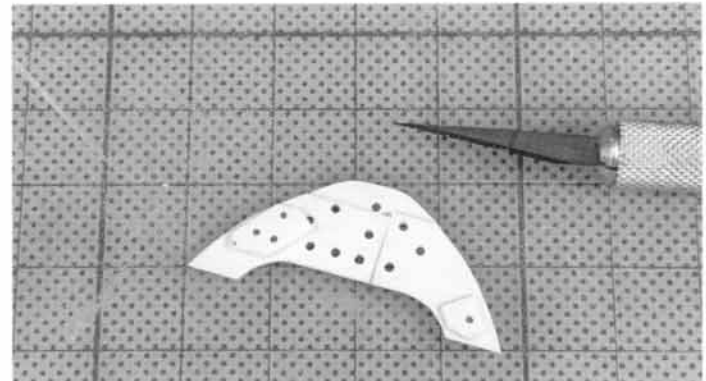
Sometimes consoles are made from more than one or two parts and you may want to add extra material to the back side to help strengthen it. The holes that are drilled through the console will allow the white glue that will be used to attach the instruments to the front of the console to seep out the back.
